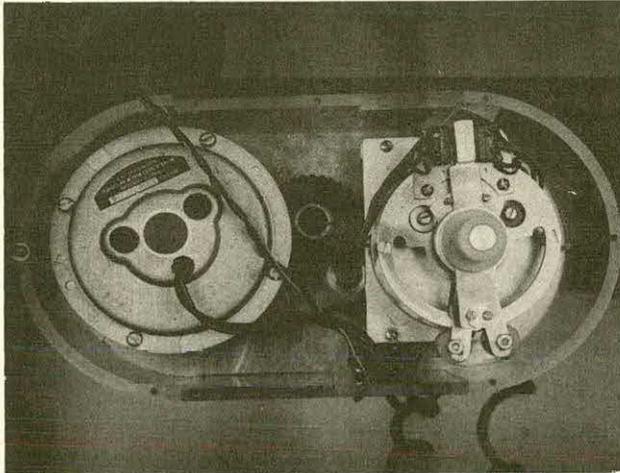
Front View of the Mechanical Control Unit with its crane handle and cover removed.
